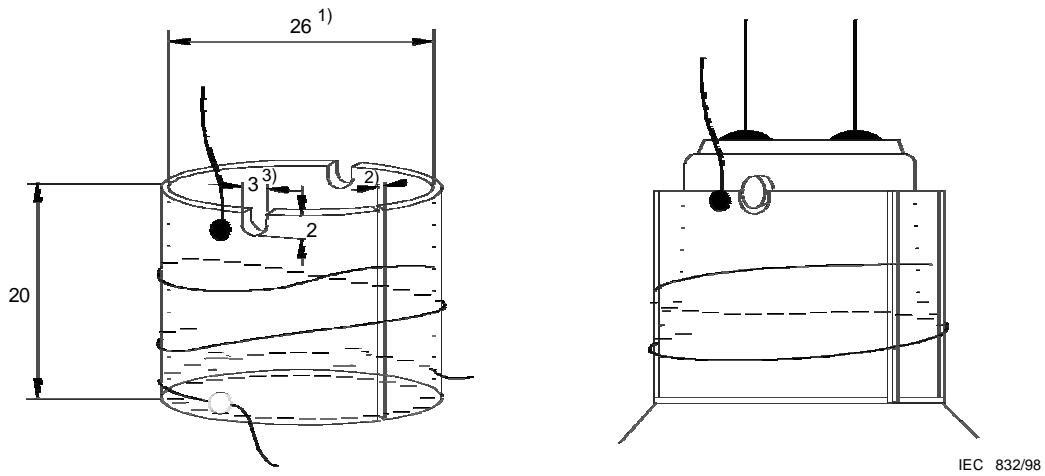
Approximate dimensions of test lampholder for E14/23 × 15 cap
